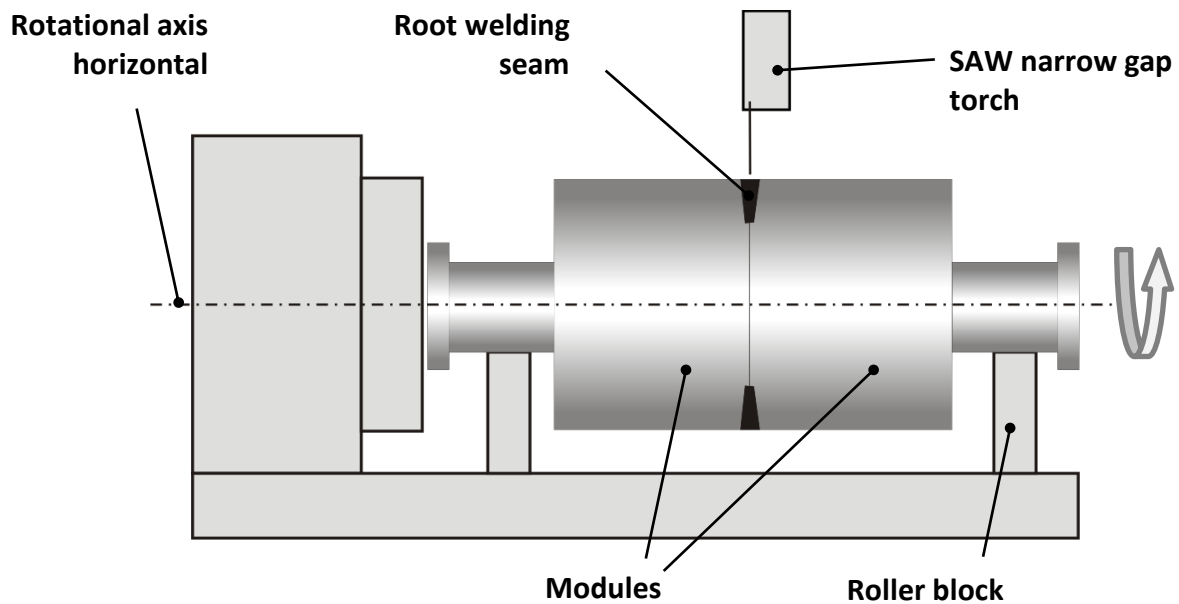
Fill welding scheme - V-H/TIG-SAW
